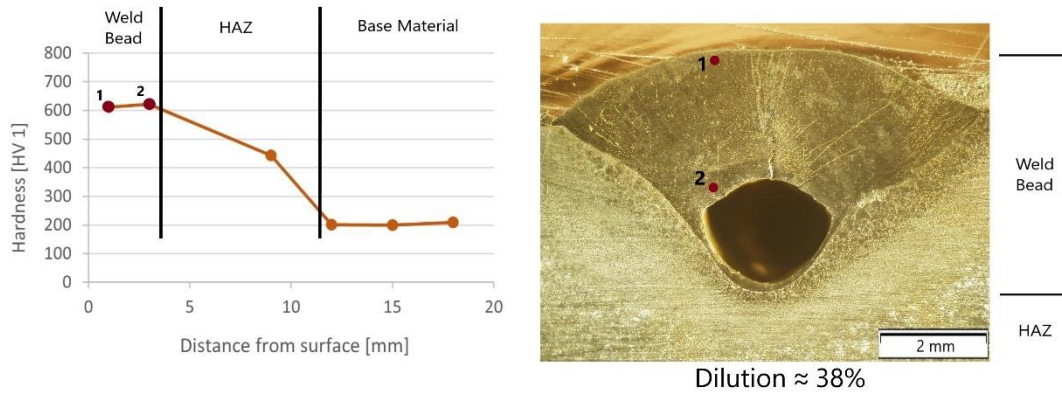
Welding Current: 170A; Welding Speed: 300mm/min; Powder Feed Rate: 10.4g/min (33)
